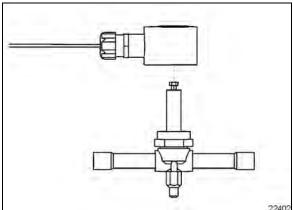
TYPICAL REFRIGERANT SOLENOID VALVE
